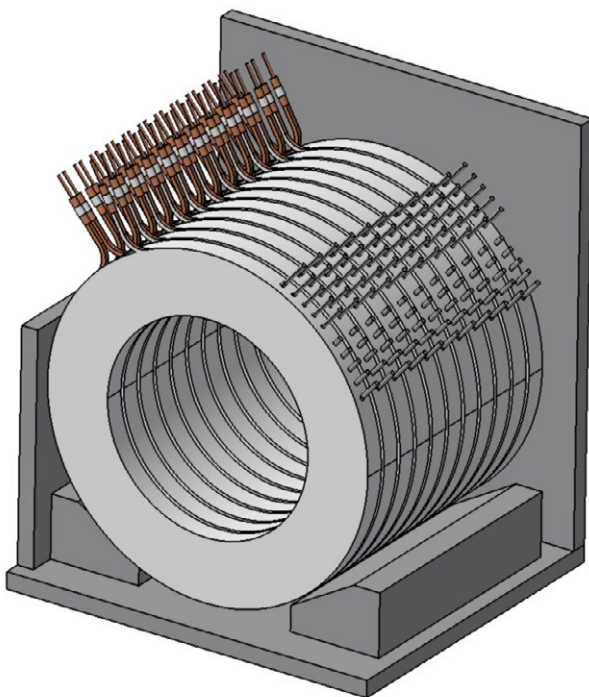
Assembly of the coil units inside the magnet yoke.
